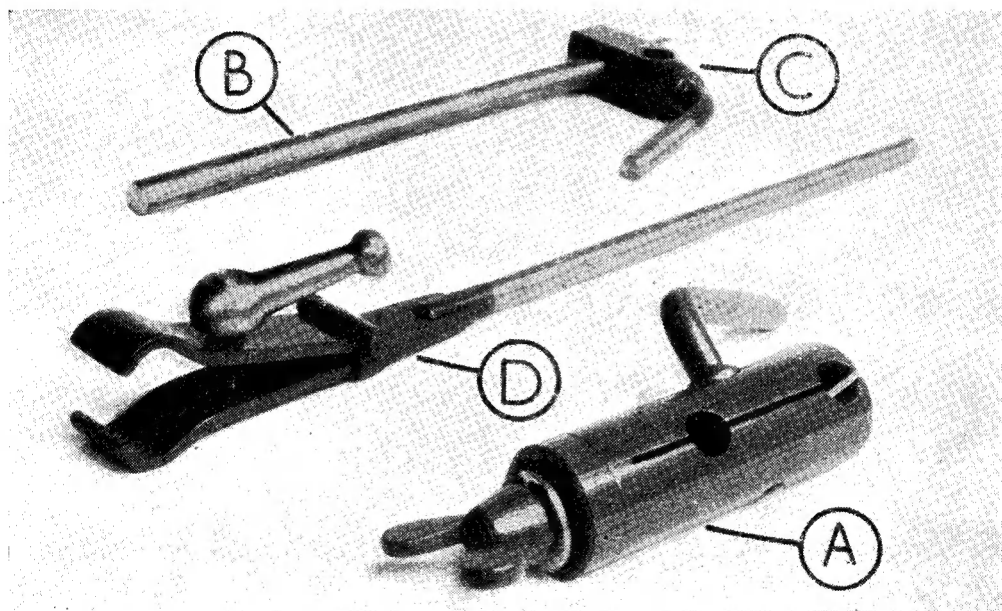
Parts of the clamping device. (A) Clamping-piece ; (B) Vertical standard ; (C) Clamp ; (D) Torch clamp
